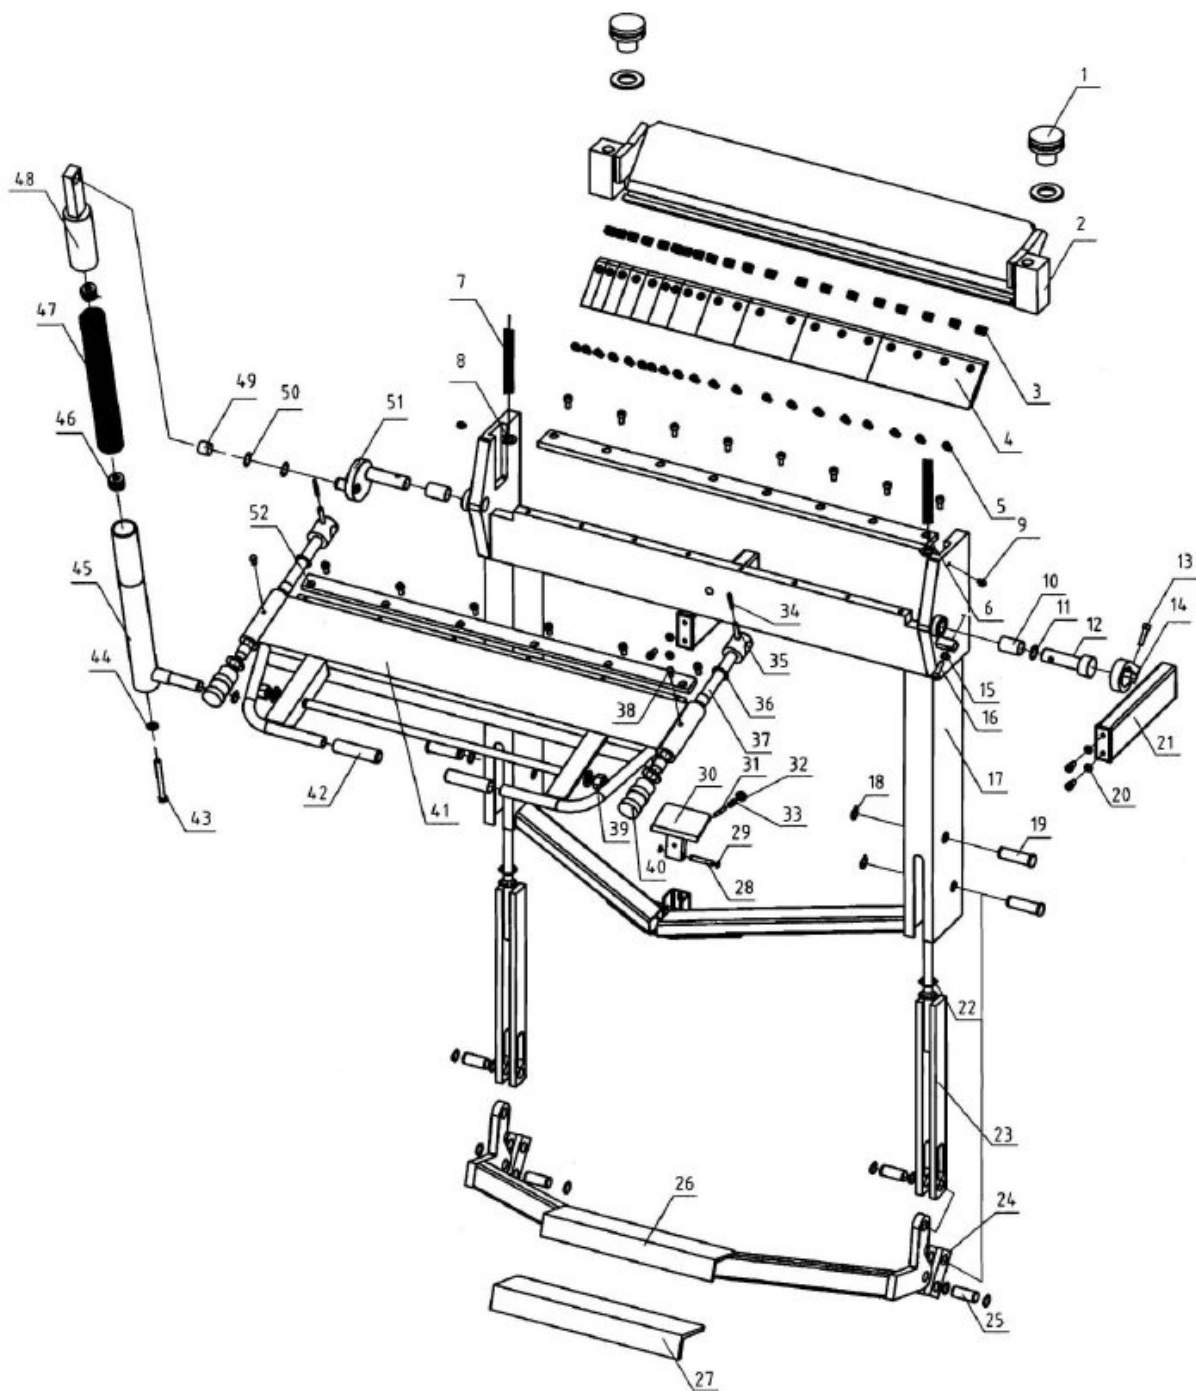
Spare parts FSBM 1020-25 E_1270-20 E_1520-15 E
